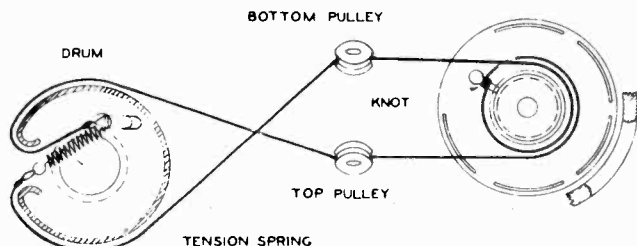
CORD DRIVE FOR BAND INDICATOR DRUM
